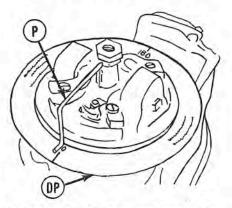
Synchronizing tool installed for adjusting the magneto points. Refer to text for details.
